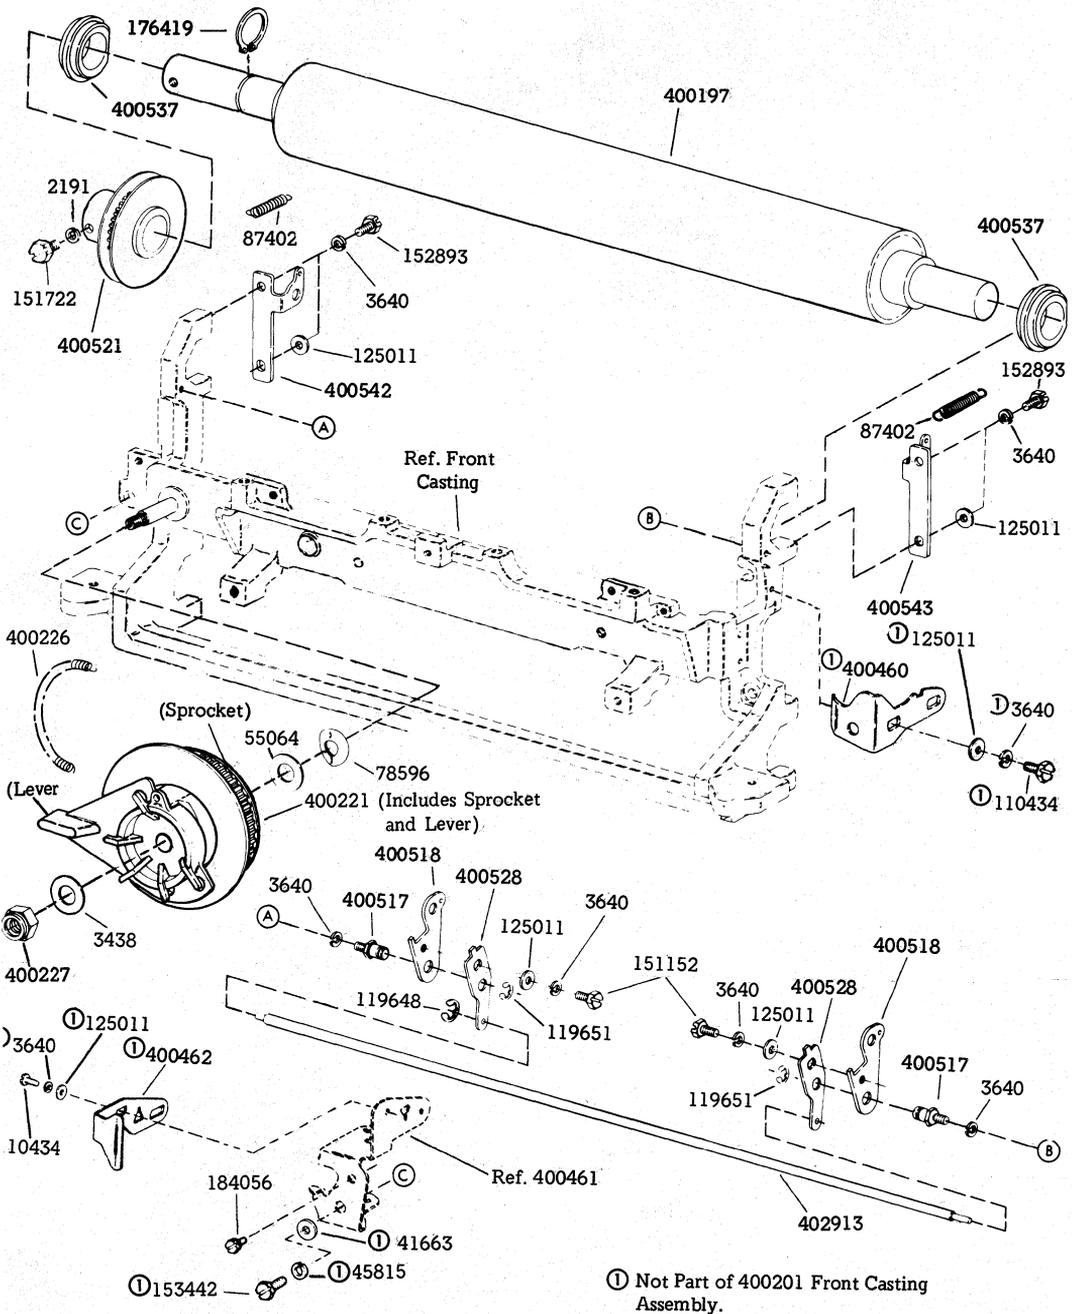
Front Casting Assembly (Friction Feed 40P101 Early Design) (Cont.)
